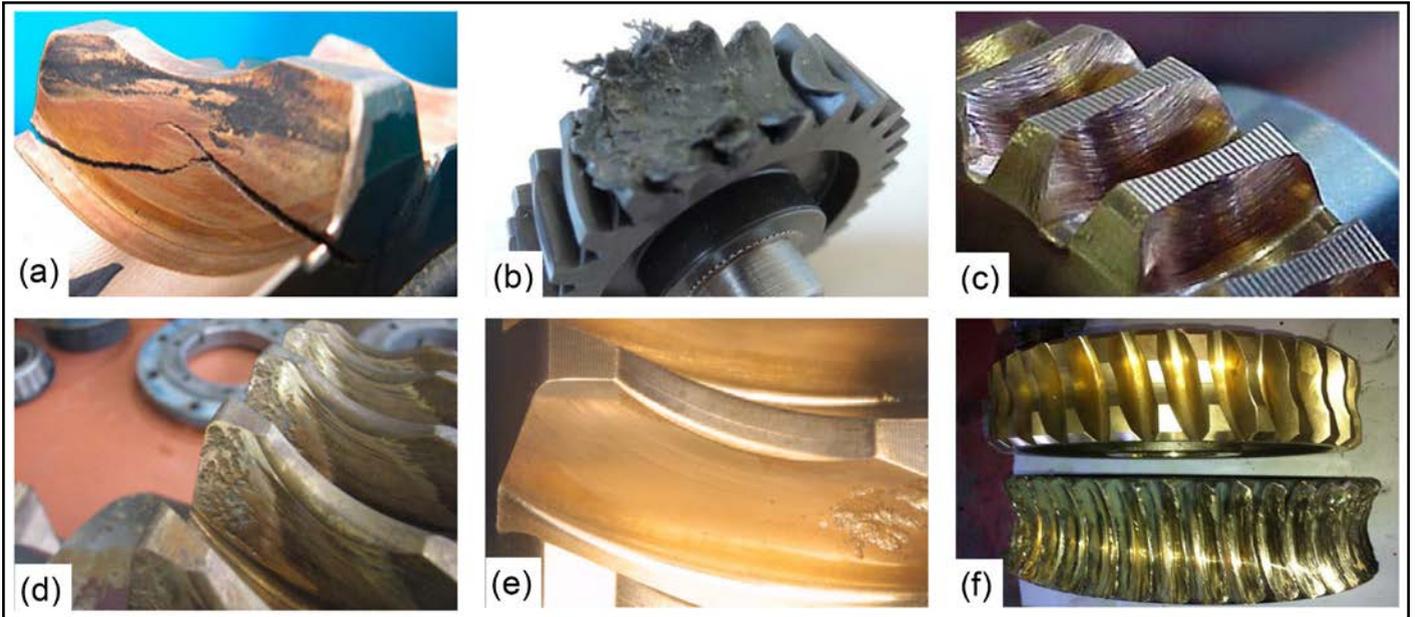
Wormgear failures: a) tooth breakage (Ref. 25); b) deformation and melting of plastic gear (Ref. 26); c) scuffing (Ref. 27); d) corrosion pitting (Ref. 28); e) pitting (Ref. 29), and f) wear — before (top gear) and after (bottom gear) usage.
